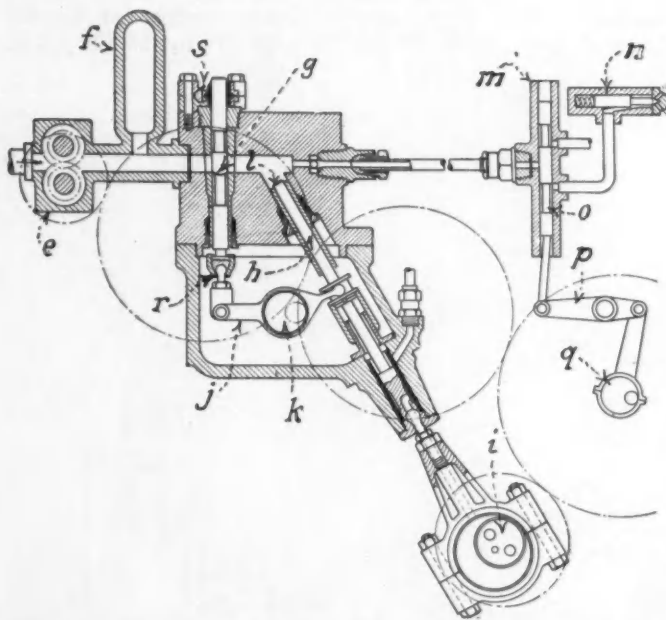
BEARDMORE ENGINE FUEL-METERING AND INJECTION SYSTEM The Gear-Pump *e* Draws Fuel from the Supply Tank and Delivers It into a Passage Extending Horizontally through the Pump-Block. An Air-Chamber, *f*, Communicates with This Passage Near the Outlet of the Gear-Pump *e* and, Farther Along, the Passage is Controlled by a Piston-Valve, *g*, Referred to as a Flash-Valve. The Pump-Plunger *h* Is Reciprocated at Crankshaft Speed from an Eccentric, *i*. The Flash-Valve *g* Is Operated from the Pump-Plunger *h* through a Double-Armed Lever *j* Which Rocks around an Eccentrically Mounted Pivot, *k*. A Delivery Passage Leads from the Pump-Chamber *l* to the Distributor *m*, from Which Connection Is Made to Injector-Valves in Two Cylinders That Fire at Intervals of 360 Deg. of Crank Motion, One of These Injector-Valves Being Indicated at *n*. The Distributor *m* Comprises a Piston-Valve, *o*, Which Is Actuated through a Lever, *p*, by an Eccentric, *q*, on the Camshaft of the Engine. Through the Distributor *m* the Pump-Chamber *l* Is Placed in Communication Alternately with the Two Injector-Valves *n*, So That One Pump Suffices for Two Cylinders
